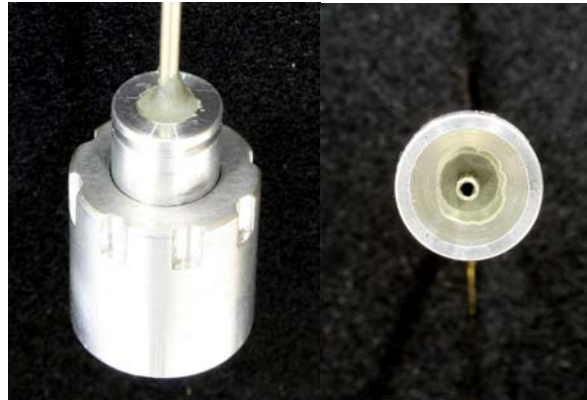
Capillary bonded to aluminum fitting. (a) View from the back of the fitting and (b) view from the front of the fitting.
